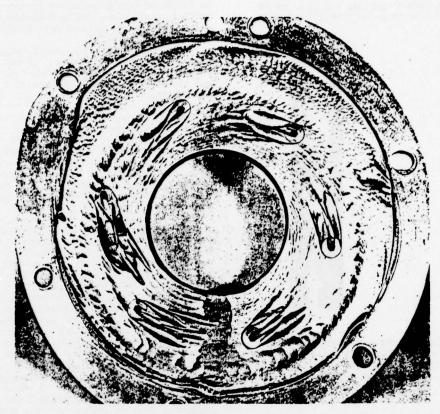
Erosion of Stainless Steel Pump Casting by Coal Slurry
